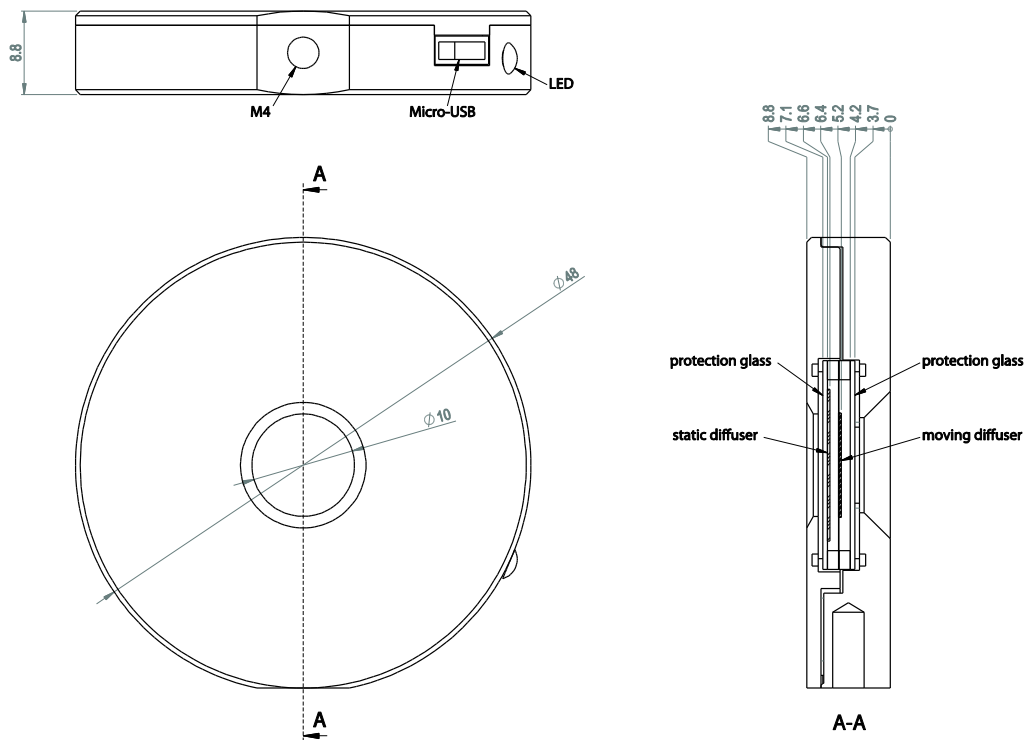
Mechanical drawing of the LSR-3010 (unit: mm)
